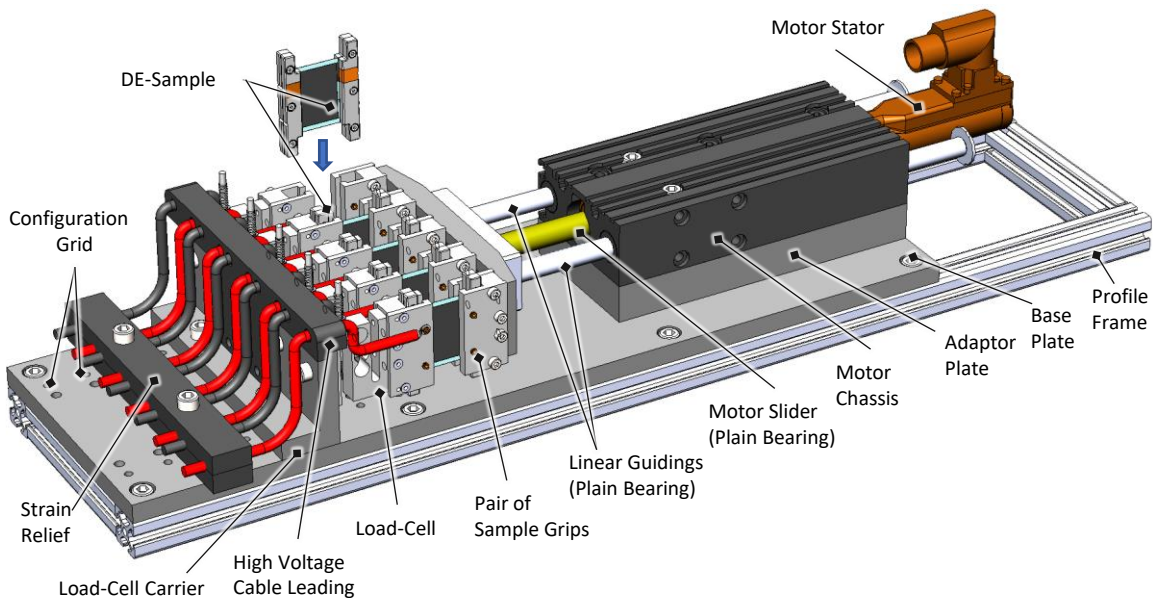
CAD design and description of a single test unit with five test stations on which five exemplary SIP samples are installed.
